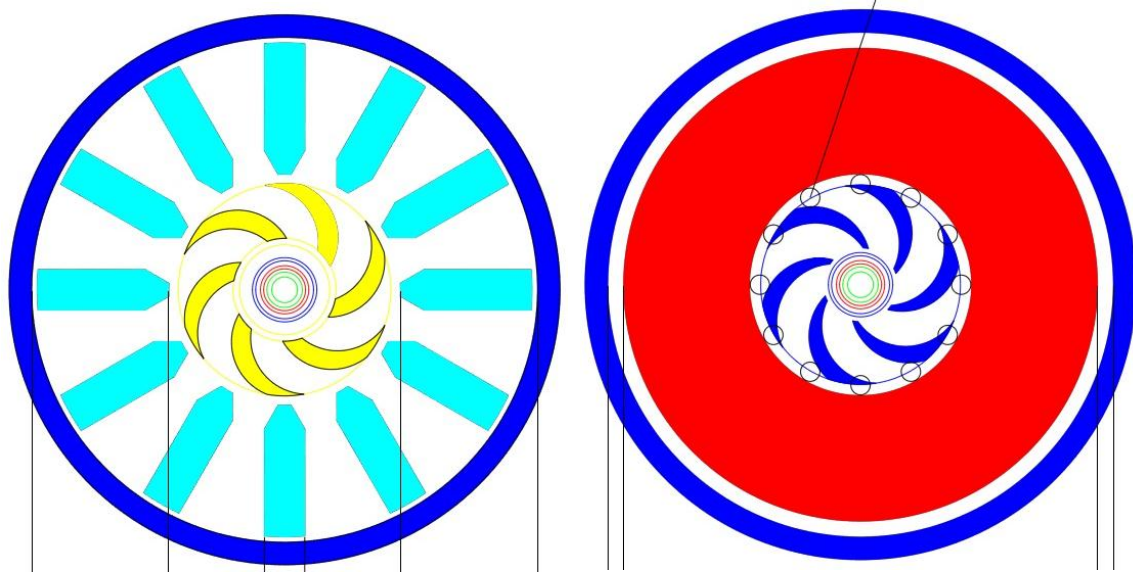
Cross section A (left) and B (right) showing outer and inner paring wheels
